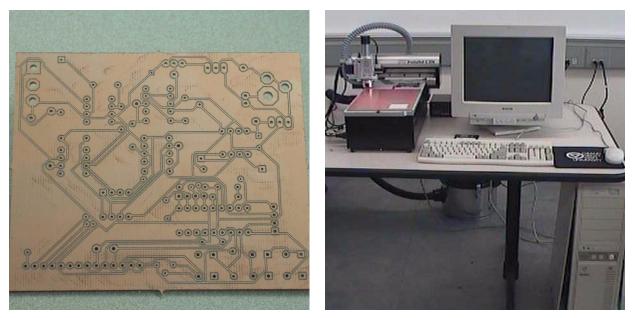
The photograph on the left shows the bottom layer of a typical milled board. The photograph on the right shows our milling system. The mill (left) is controlled by a PC computer via a standard serial port connection. The vacuum system is partially visible under the table. Not shown are the supplies (boards, drill bits, etc.) that occupy additional space to the left of the mill.
